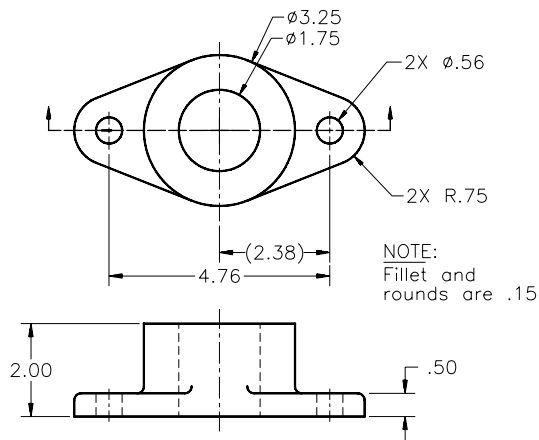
Drawing for Exercise 11: draw the front view in section
